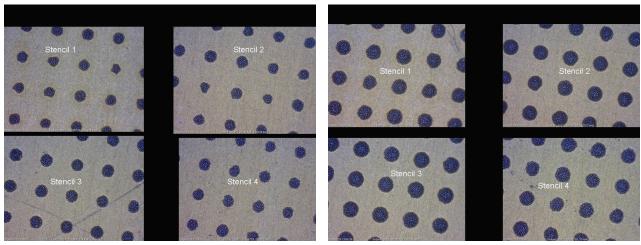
Solder Bricks: 5 mil stencil, 8 mil aperture
